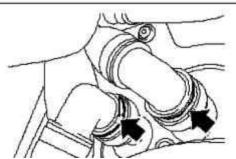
Connecting the hoses of the cooling system: 1 - socket radiator heater, 2 - clamps, 3 - locking mechanism
